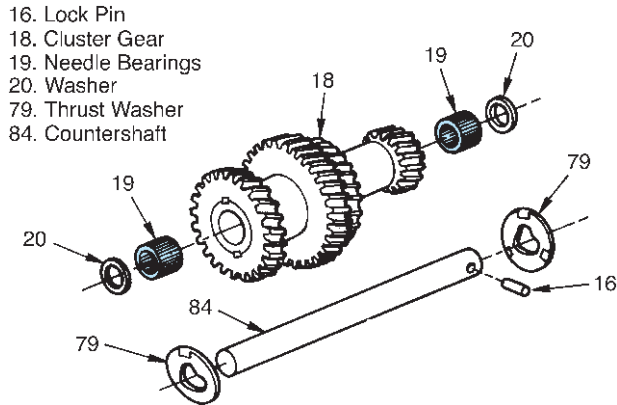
This cluster gear is mounted on two sets of needle bearings (19) on the countershaft (84) and uses two thrust washers (79) to absorb thrust loads. Note the lock pin (16), which keeps the countershaft in place and prevents rotation. (Courtesy of Ford Motor Company)
